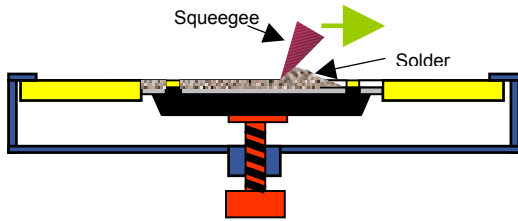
Solder paste is applied through stencil to the under surface of the LFCSP
